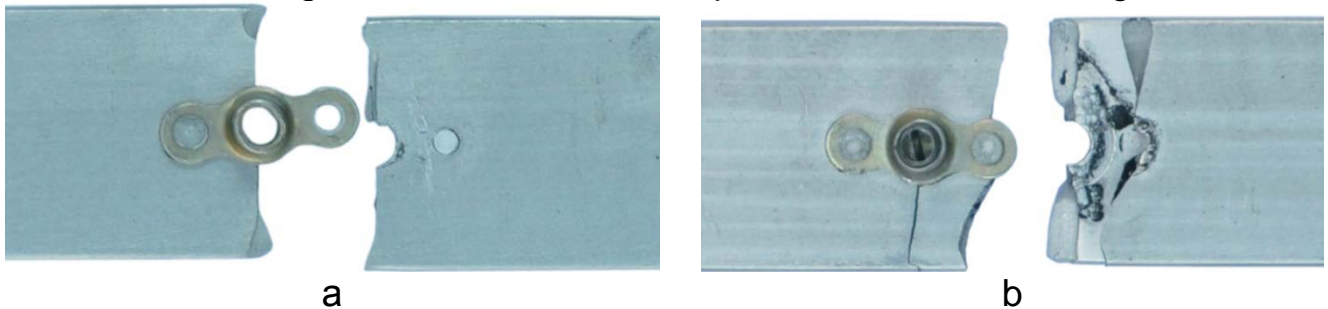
Fatigue Failure Nature of Test Pieces:
